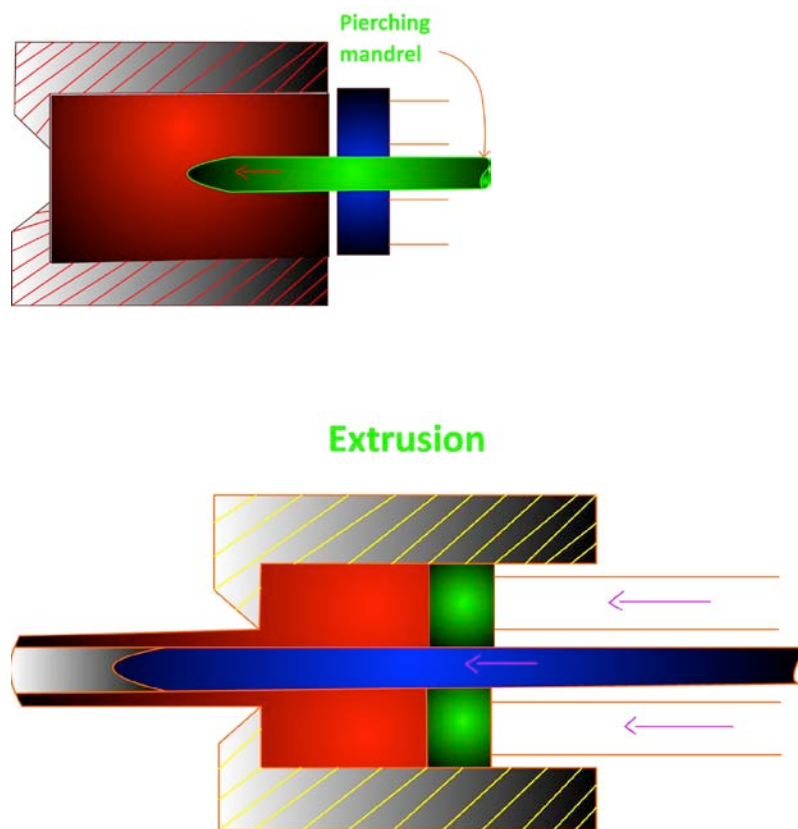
Extrusion of tubes – piercing and extrusion
